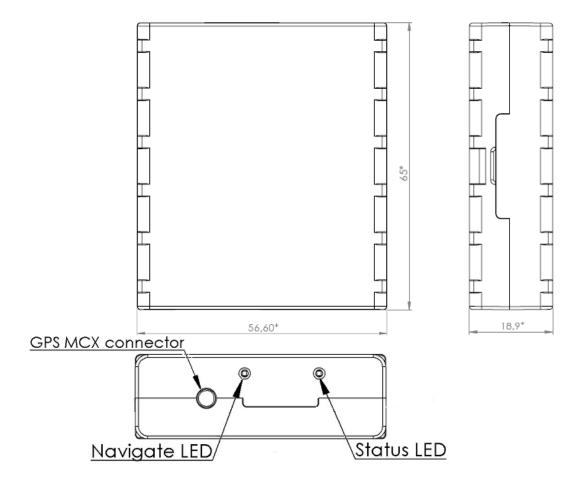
FM1122 view & dimensions (tolerance ±2mm)
